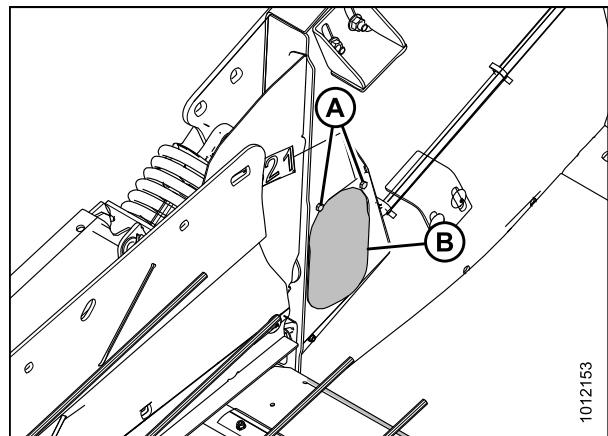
RH Header Height System Access Panel (Auger Removed for Clarity)
